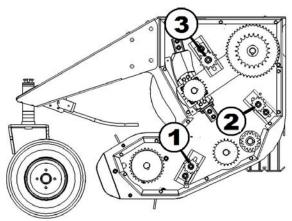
Tensioner Sprockets Key 1 - Cylinder Chain Tensioner Key 2 - Primary Auger Chain Tensioner Key 3 - Secondary Auger Chain Tensioner
